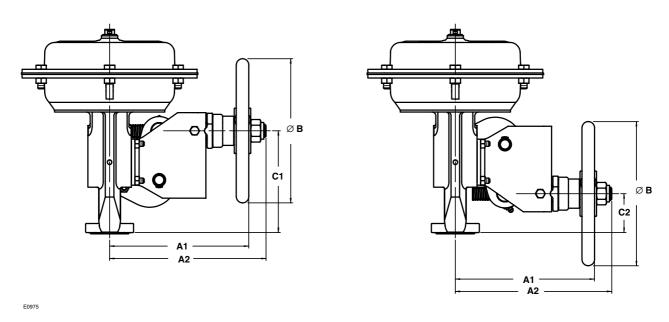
Design GX with Handwheel Dimensions (also see table 20)
